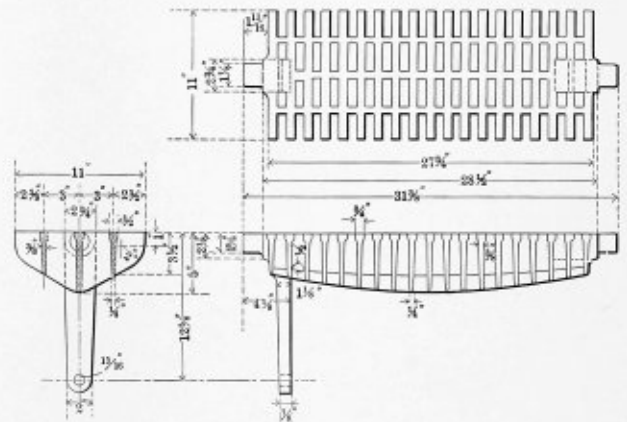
GRATE SHOWING DIMENSIONS OF ARM.
